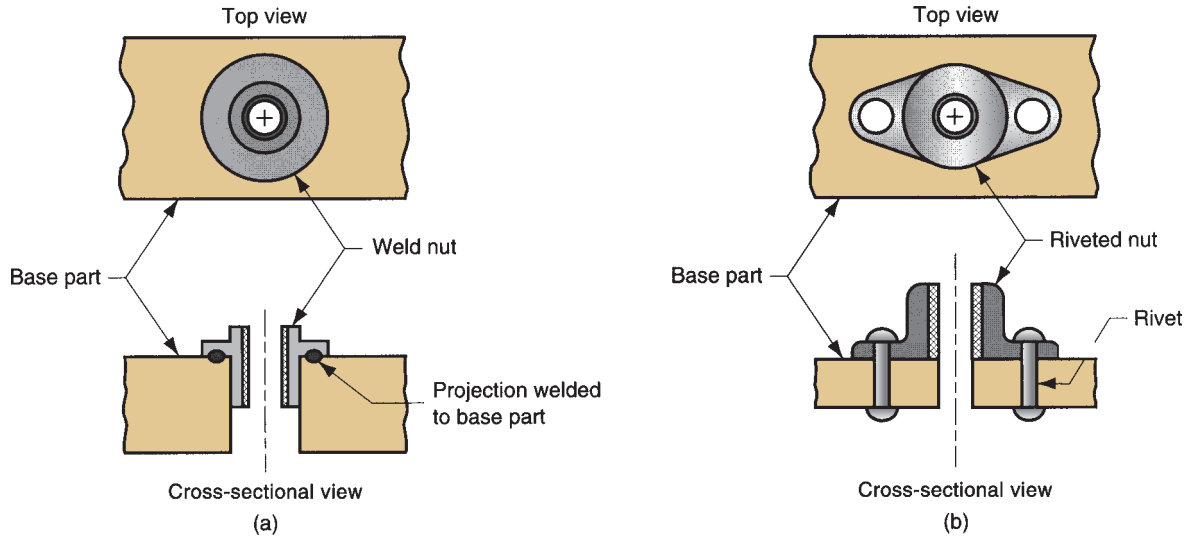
Captive threaded fasteners: (a) weld nut, and (b) riveted nut.
